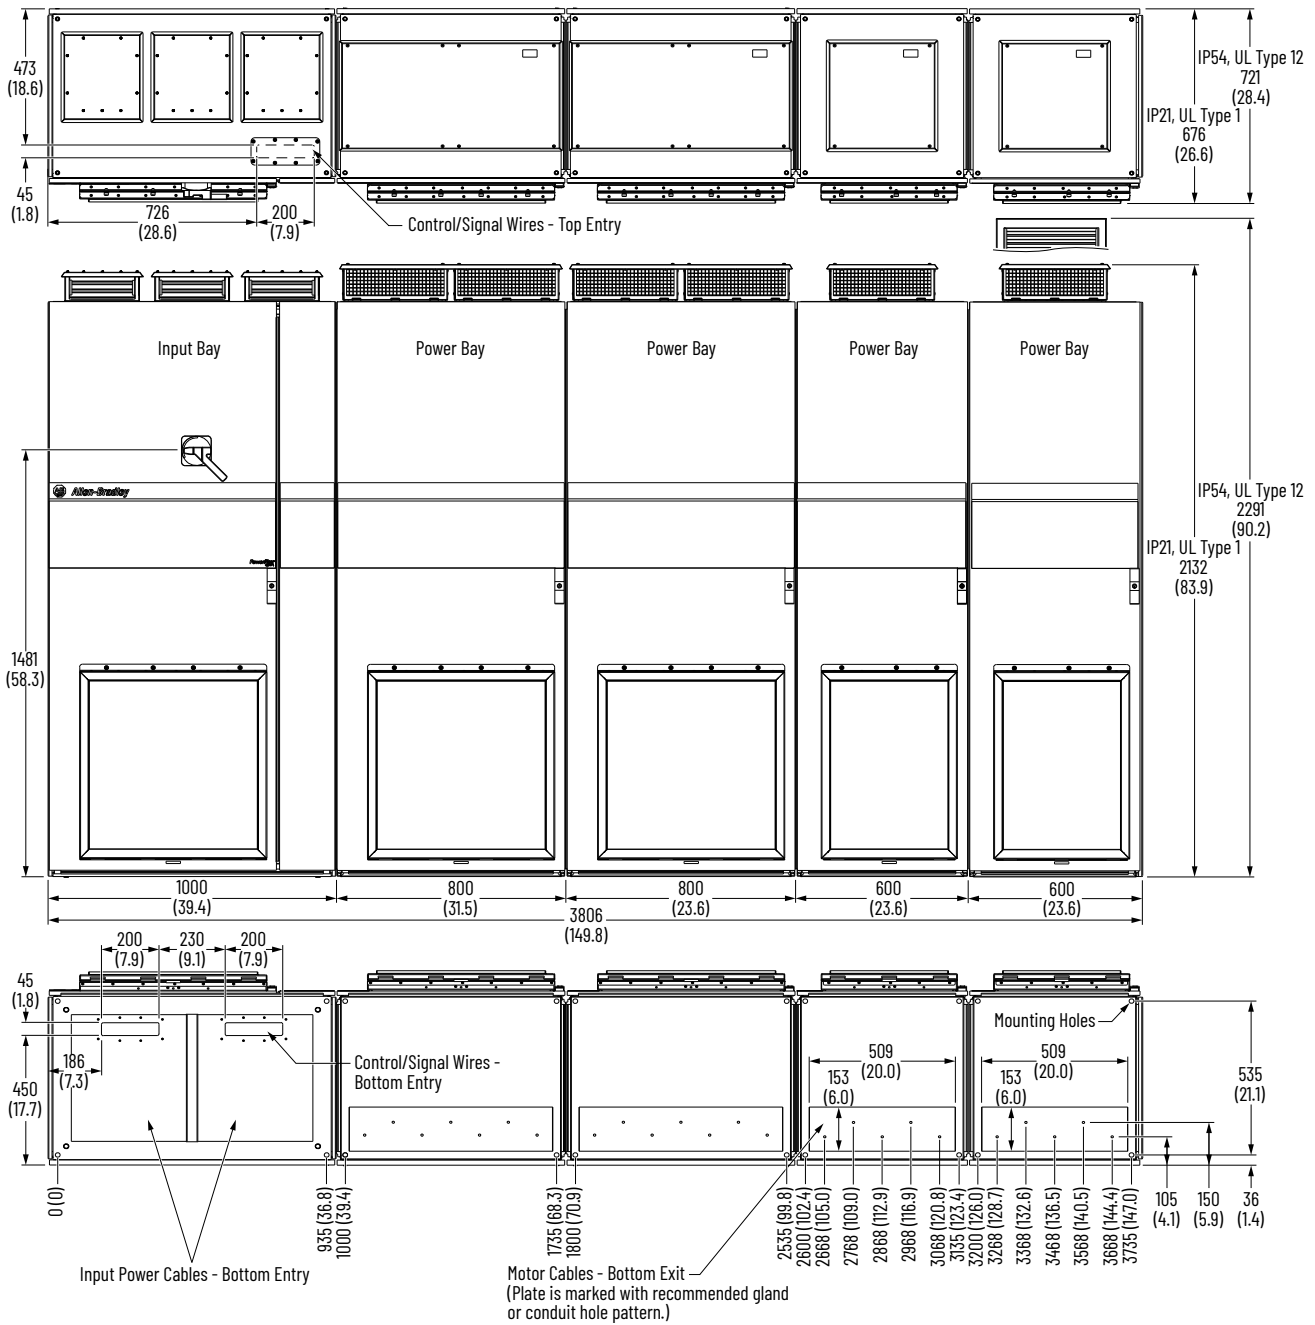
Frame 10 Drives—Top, Front, and Bottom Views—Dimensions are in mm (in.)
